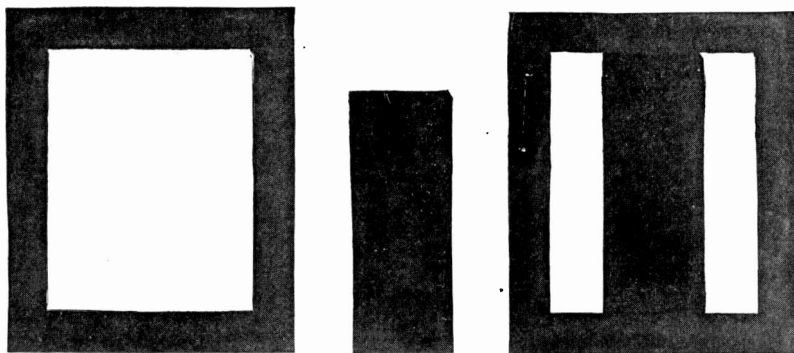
Core Punchings for Crocker-Wheeler "Remek-Type" Transformer
